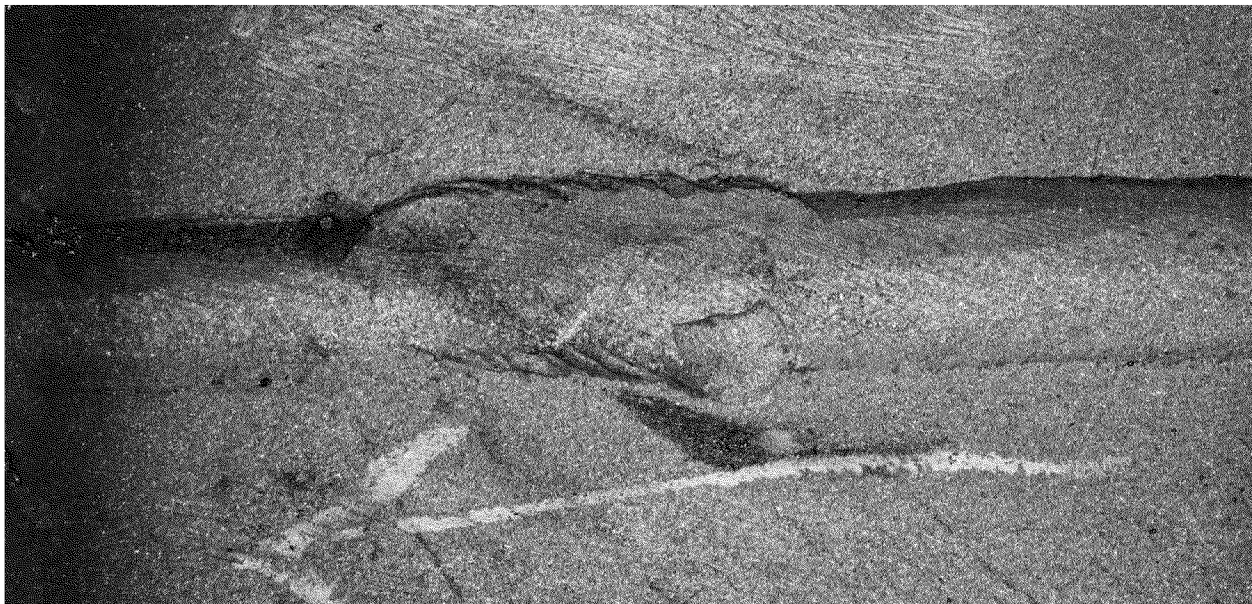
Seam Weld Repair, T117-CE-LS-E, Interior Surface
